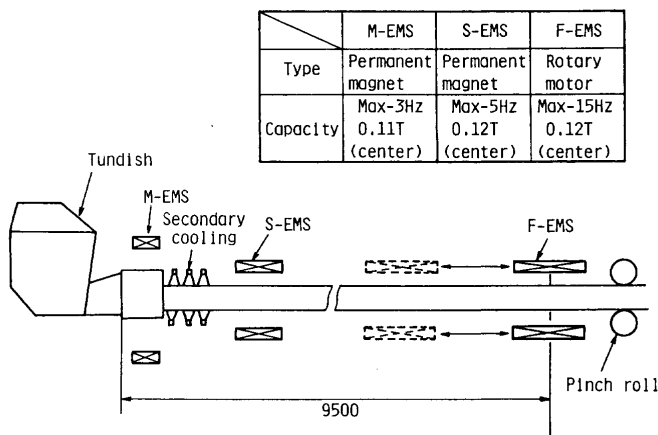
Schematic diagram of horizontal continuous casting (HCC) machine.
